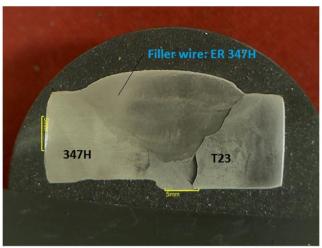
Combination of 347H+T23 welded with filler wire ER347H.
